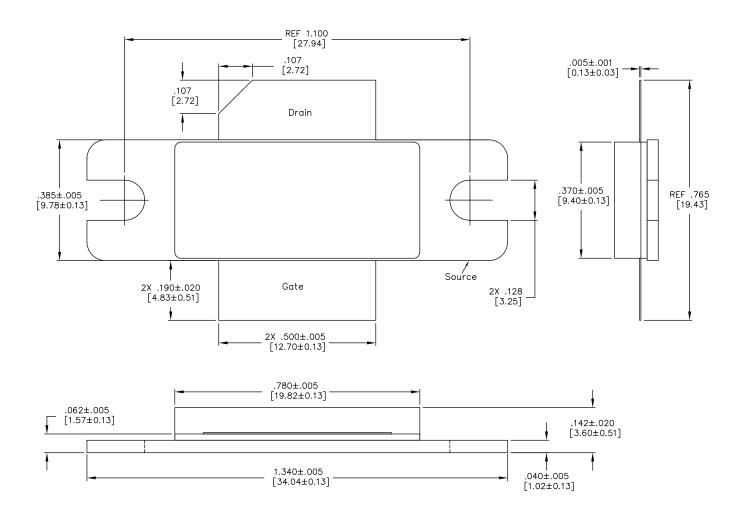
AC780B-2 Metal-Ceramic Package Dimensions and Pinout (all dimensions are in inches [mm])
